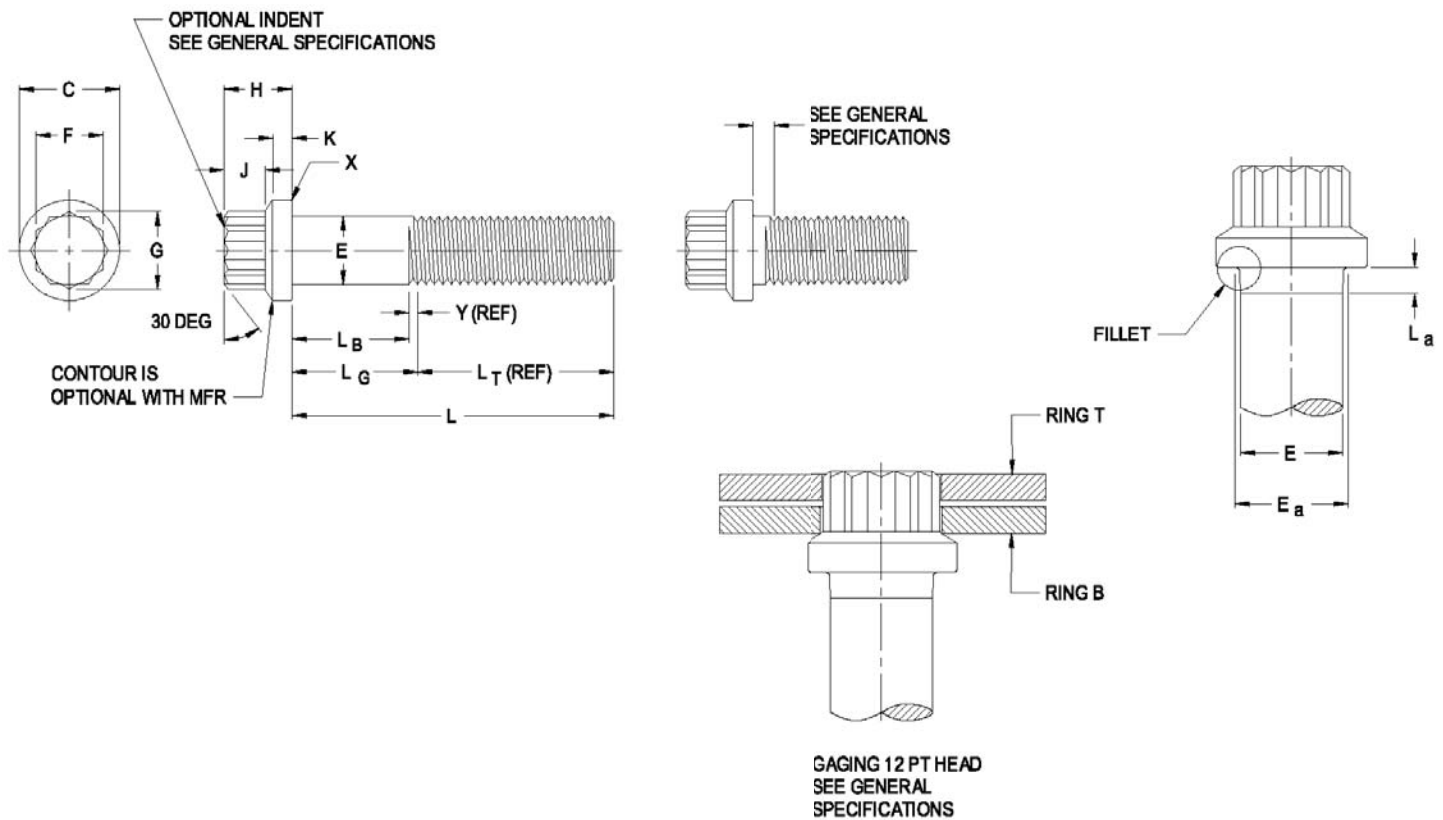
DIMENSIONS OF FLANGED 12-POINT SCREWS AND HEAD GAGING RINGS
